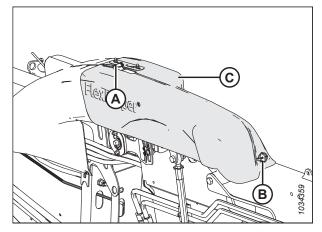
Inboard Flex Linkage Cover - Left Side
